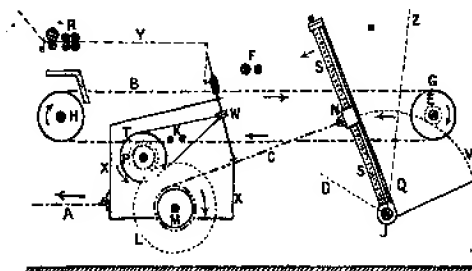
SPINDLE DRIVING DURING WINDING.
